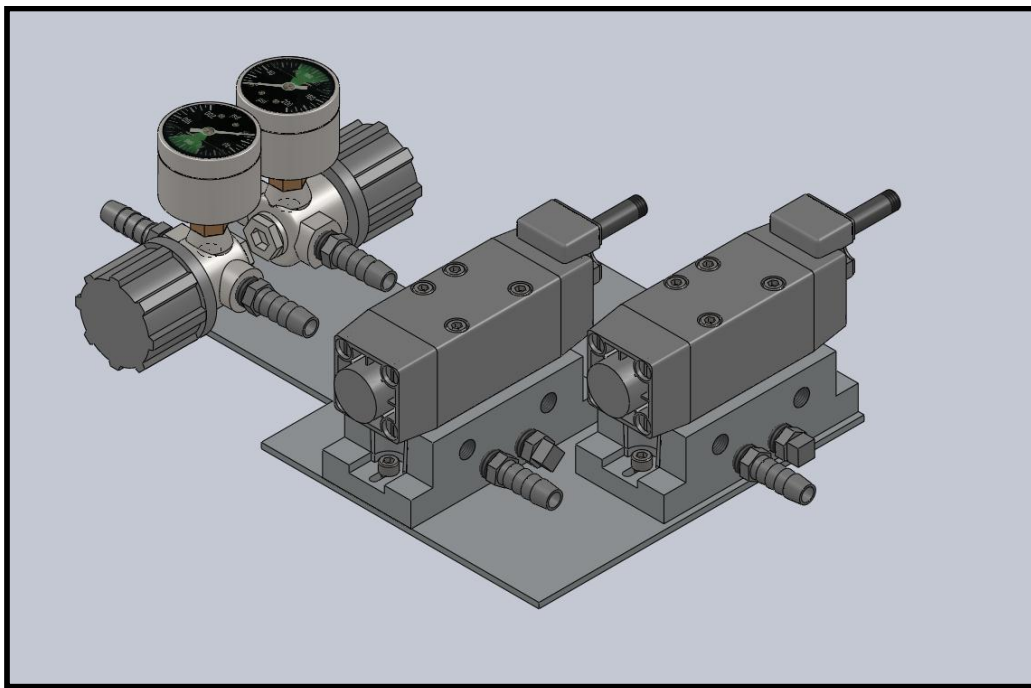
Fatigue Testing Machine Loading Module.
